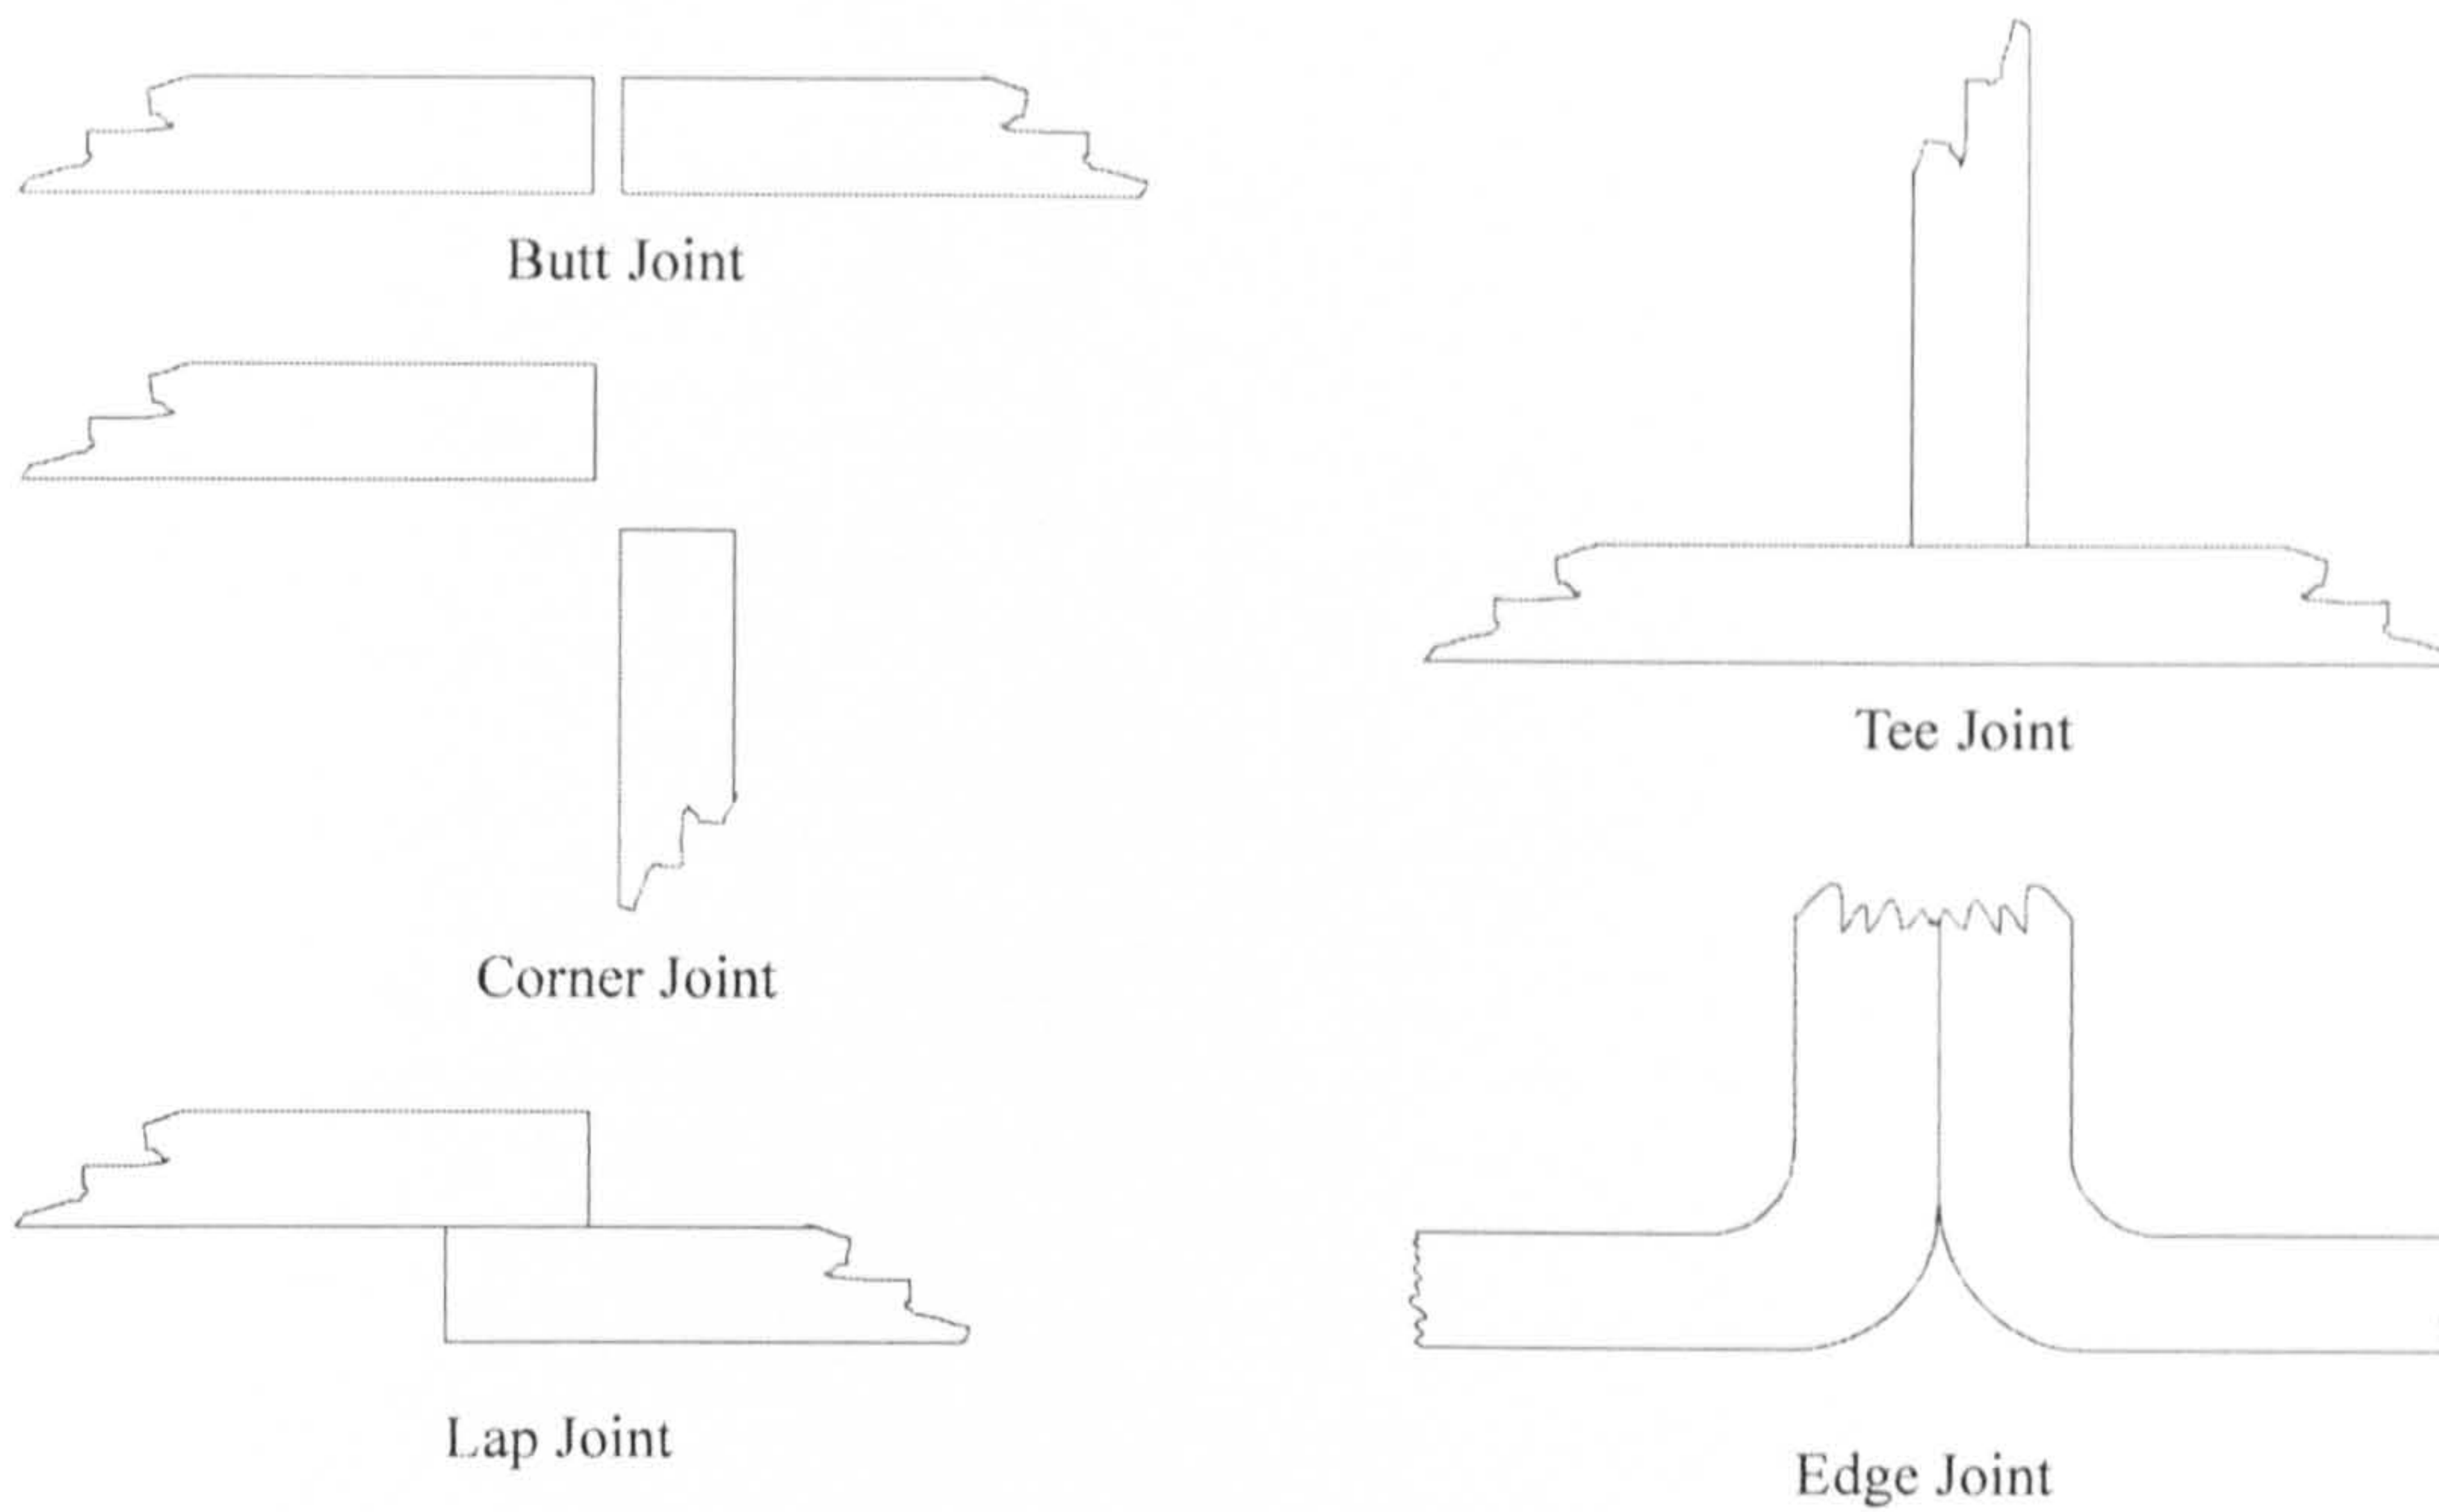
Types of Welded Joints⁷⁷
